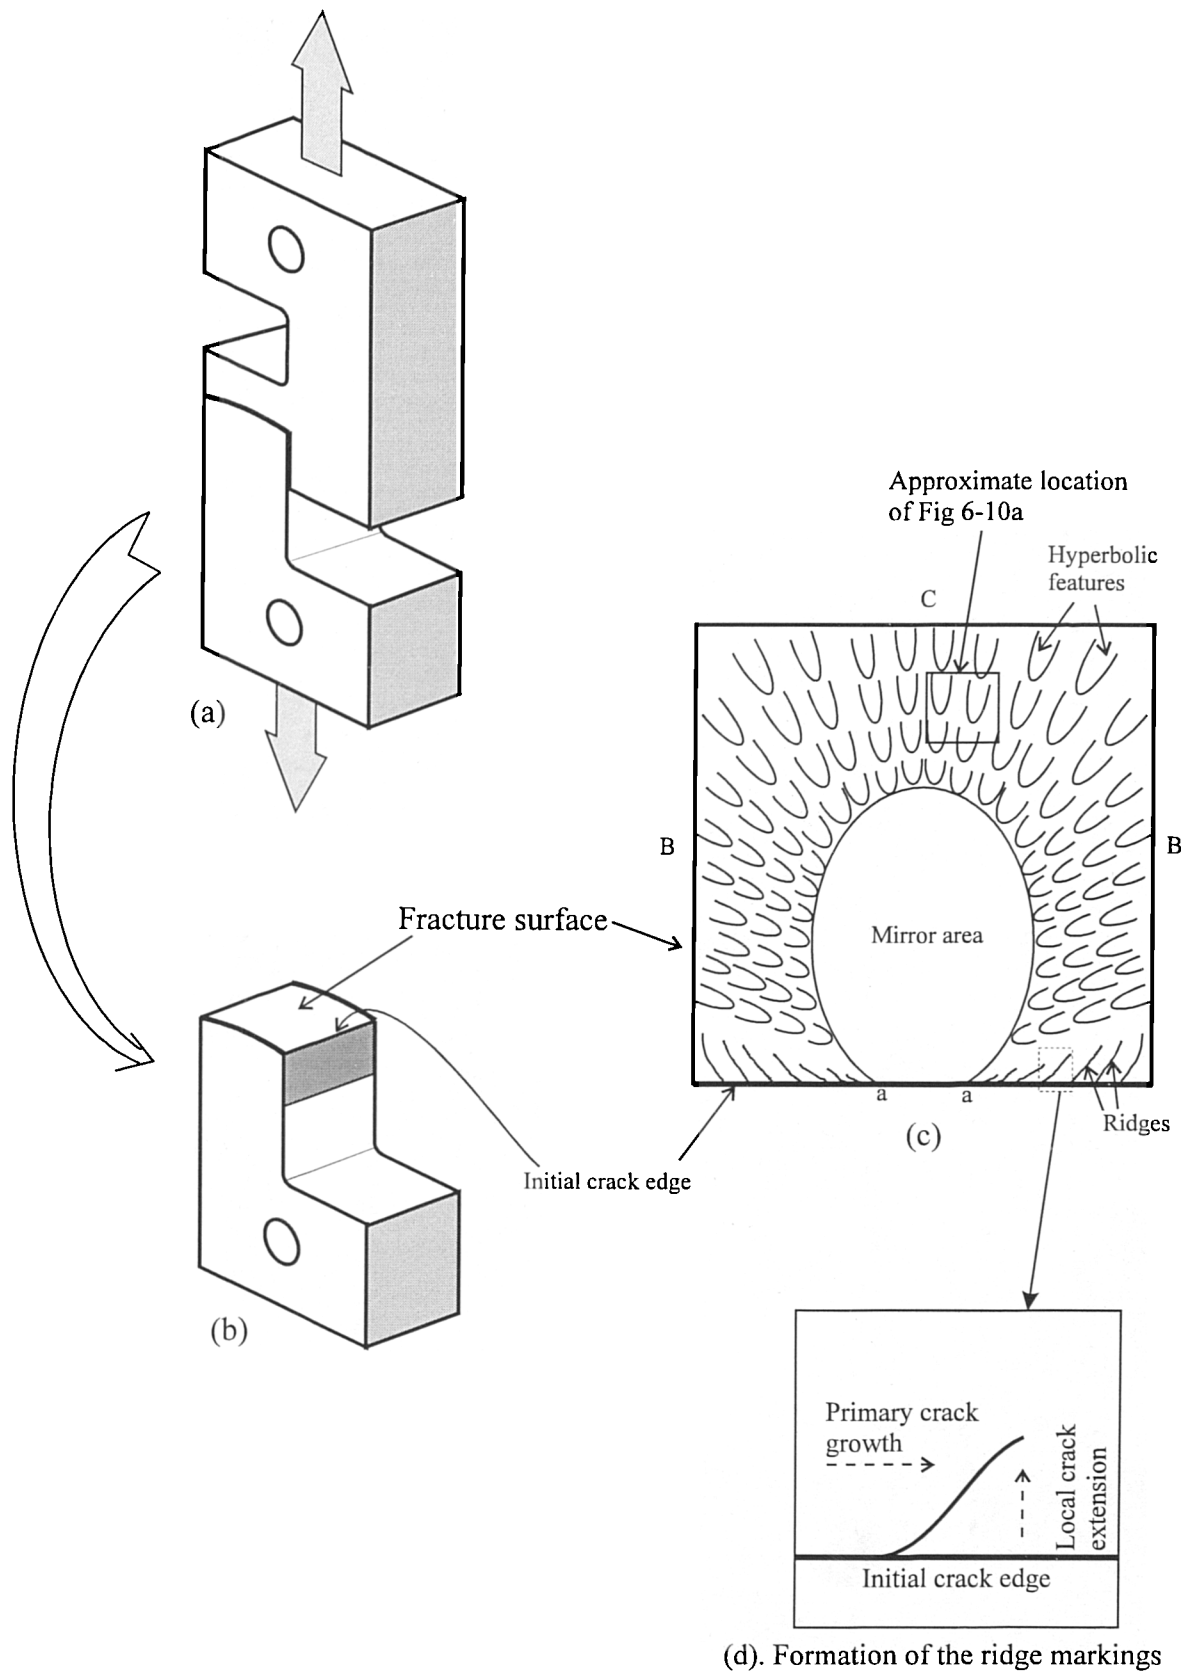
Fracture surface for the positive T shear specimen.
